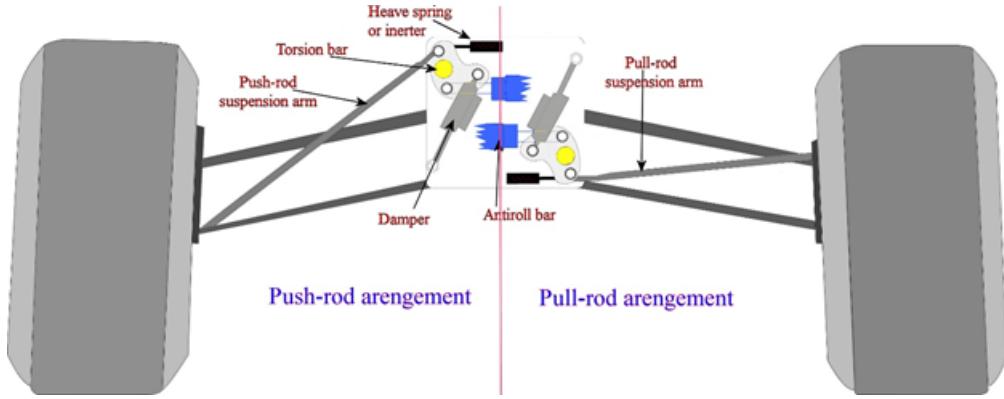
Push-rod vs pull-rod suspension arrangements [28]
